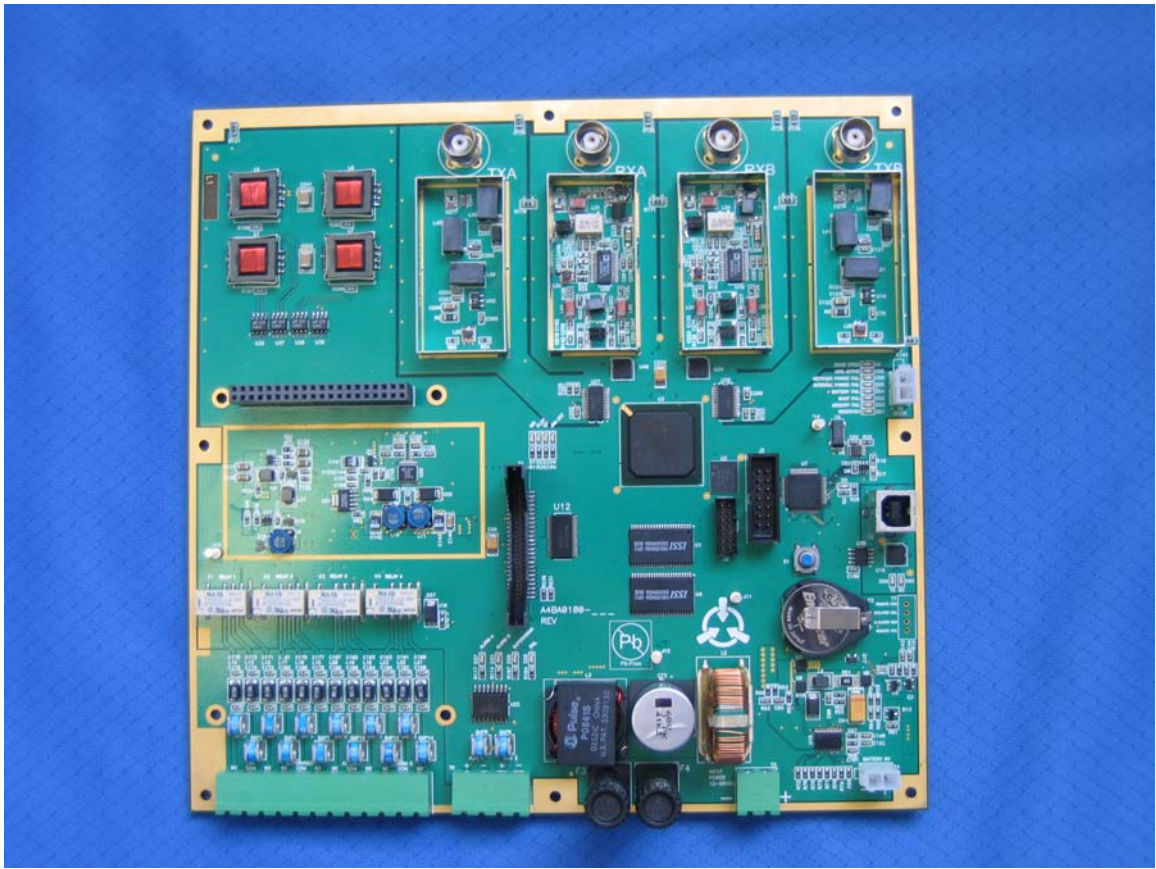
Omnitrax PCB Top Side With RF Shields Removed
